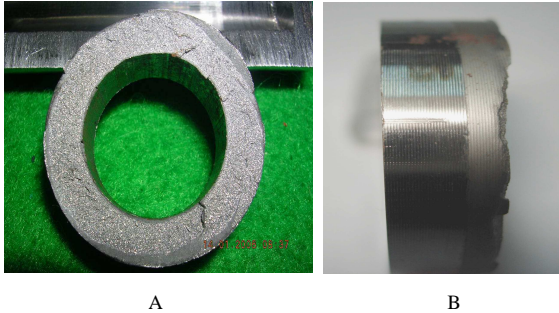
Fracture surface of steering shaft. A) vertical appearance, B) horizontal appearance.
